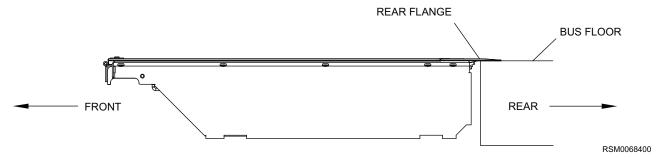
RAMP INSTALLATION (SHORT RAMP SHOWN)
